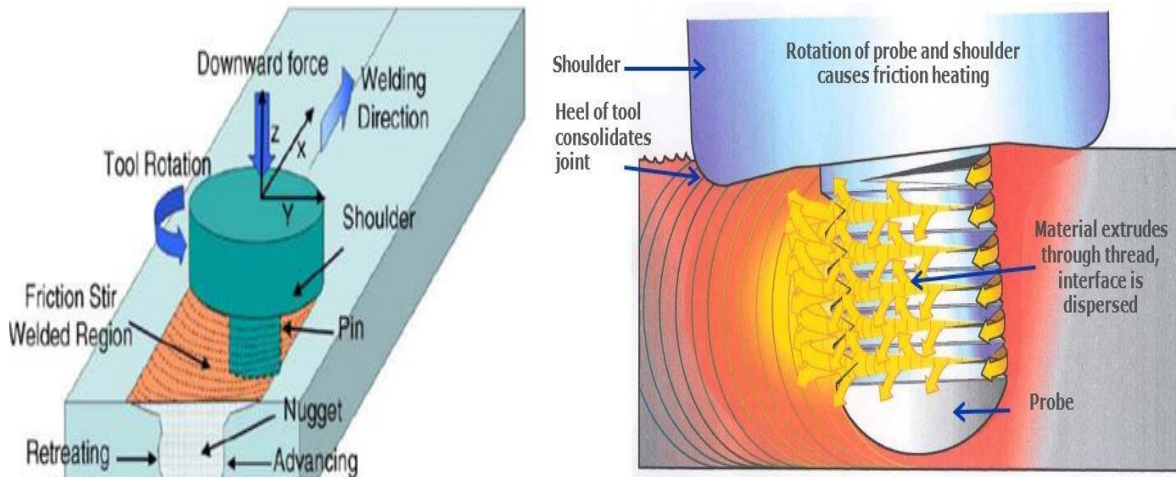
Schematic drawing of stir welding with friction [6]
